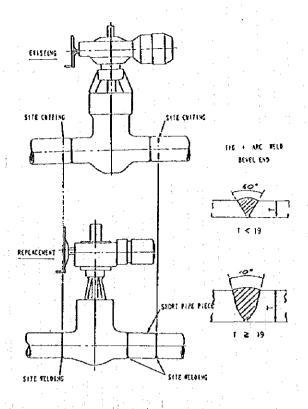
SHORT PIPE ARRANGEMENT FOR WELDED TYPE VALVE
